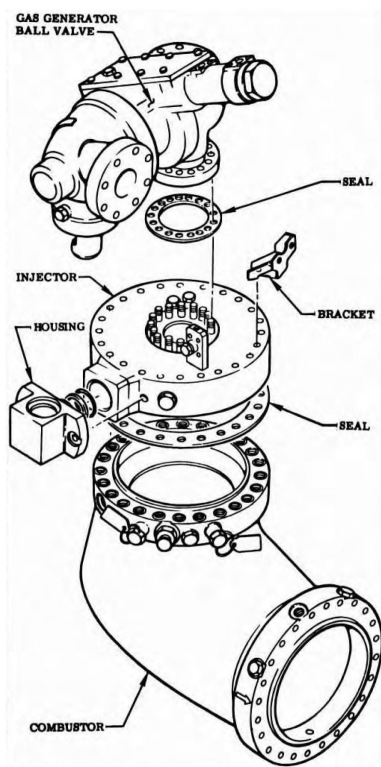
Gas generator assembly of Rocketdyne's F-1 rocket engine, showing the bipropellant ball valve [31].
